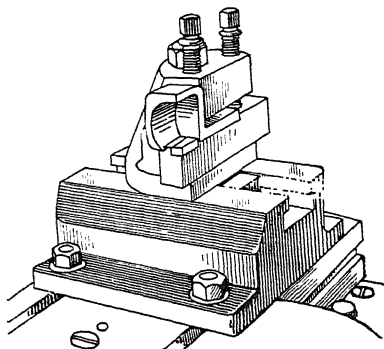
Toolholder and patented chip breaker. The chip is tightly curled, broken in 3- or 4-in. lengths and directed into the lathe chip pan. (*The American Tool Works Company.*)
